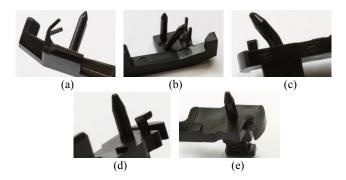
Failure on (a) Limiter pins (b) Spreader pins (c) Comb shaft (d) Bended Lock unit (e) Broken Lock unit
